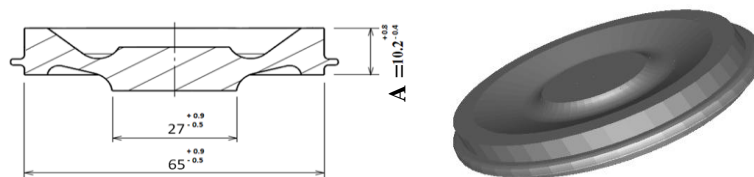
Workpiece obtained via hot forging and the observed variable A emplacement
